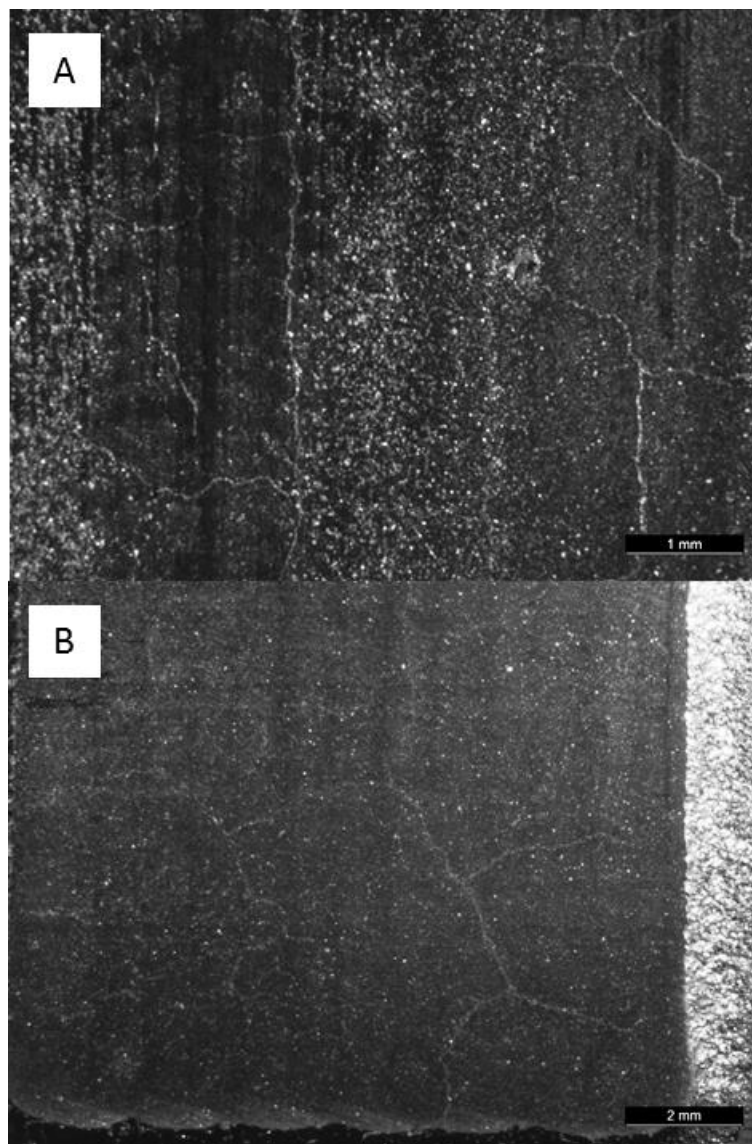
Cracks detected after the machining process of the coatings: A) Coating 1, P=400W; B) Coating 2, P=600W.
